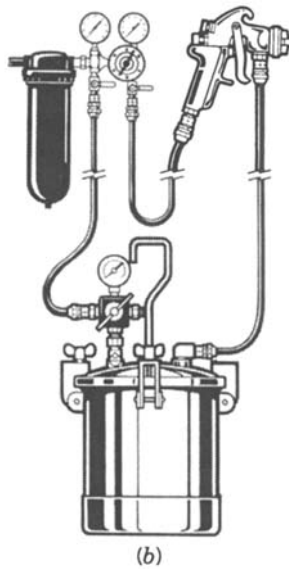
Pressure feed tank hookup. Source: Courtesy of DeVilbiss Industrial Coating Equipment.
